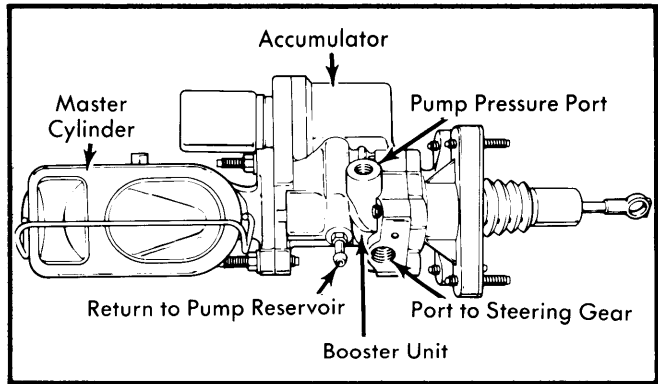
Typical Hydro-Boost Power Brake Unit (Cadillac Shown)
